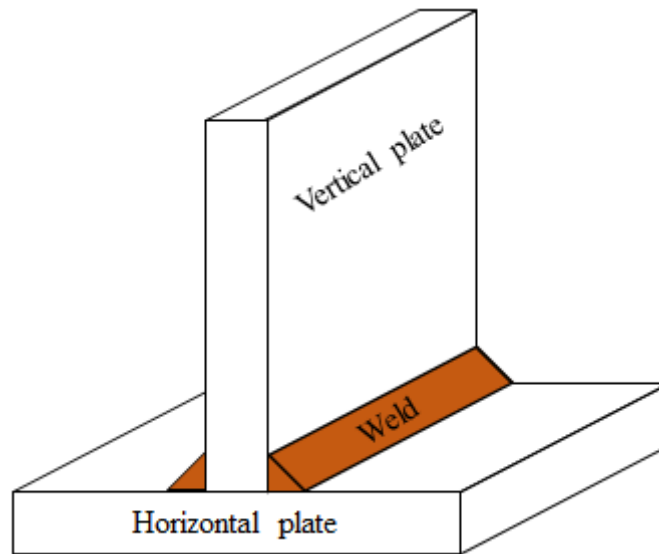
Illustration of a fillet welded T joint formed by a vertical and a horizontal plate.
